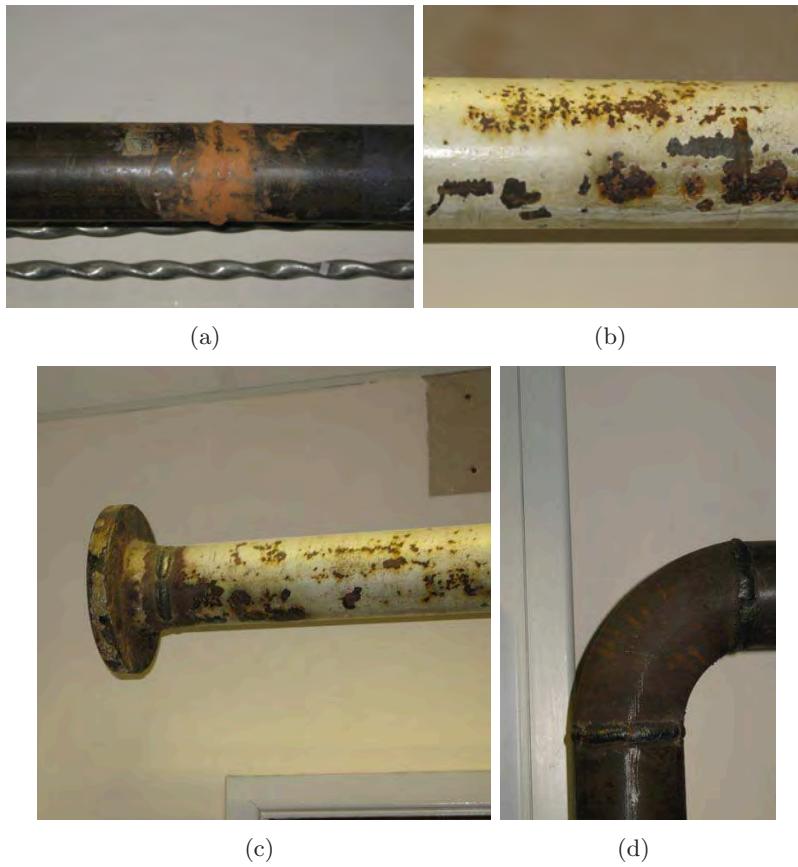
Pipe mockup used in the demo-test. Two long tubes welded of several parts (left). Curved part of the tube (right).
